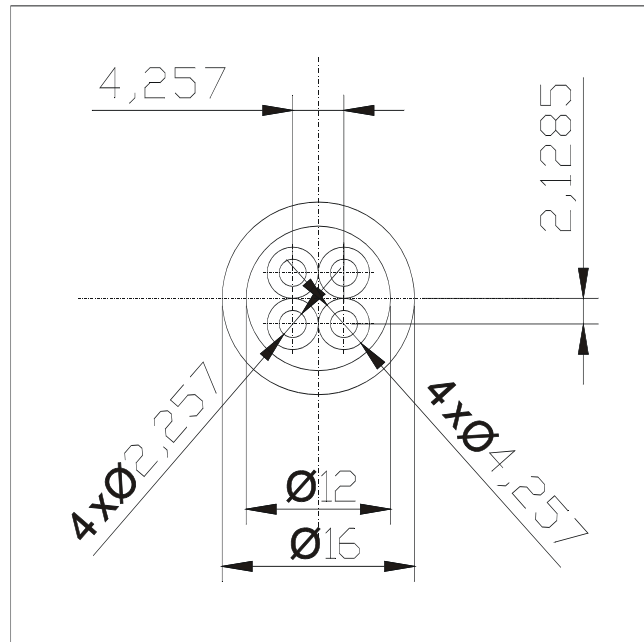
Illustration of the geometry of the cable *NYY-O 4x4 re* (dimensions in millimeters)
